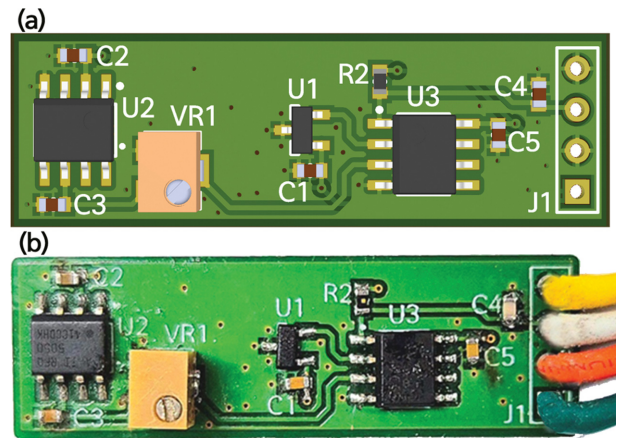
(Color online) (a) PCB layout of the coolant minimum-level detector using the Hall sensor; (b) Assembled PCB with soldered components.
